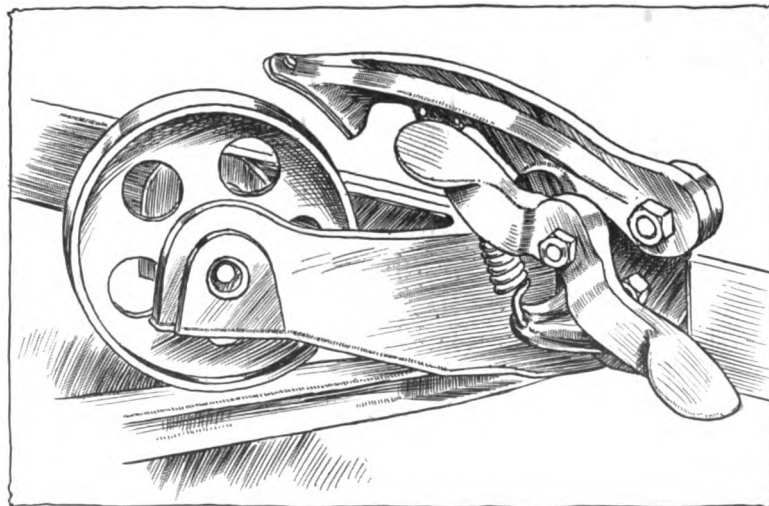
Ball-bearing roller and brake shoe of Pitless turntable
